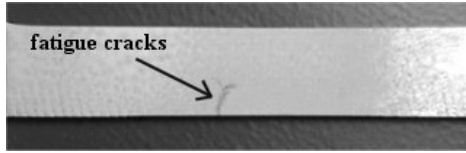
Fatigue cracks on AISI 304 sample;
